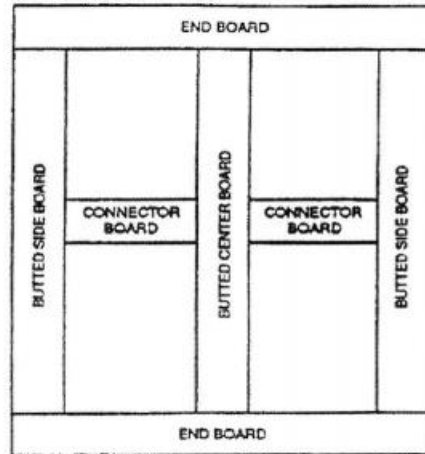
Perimeter and cruciform bottom deckboard constructions
